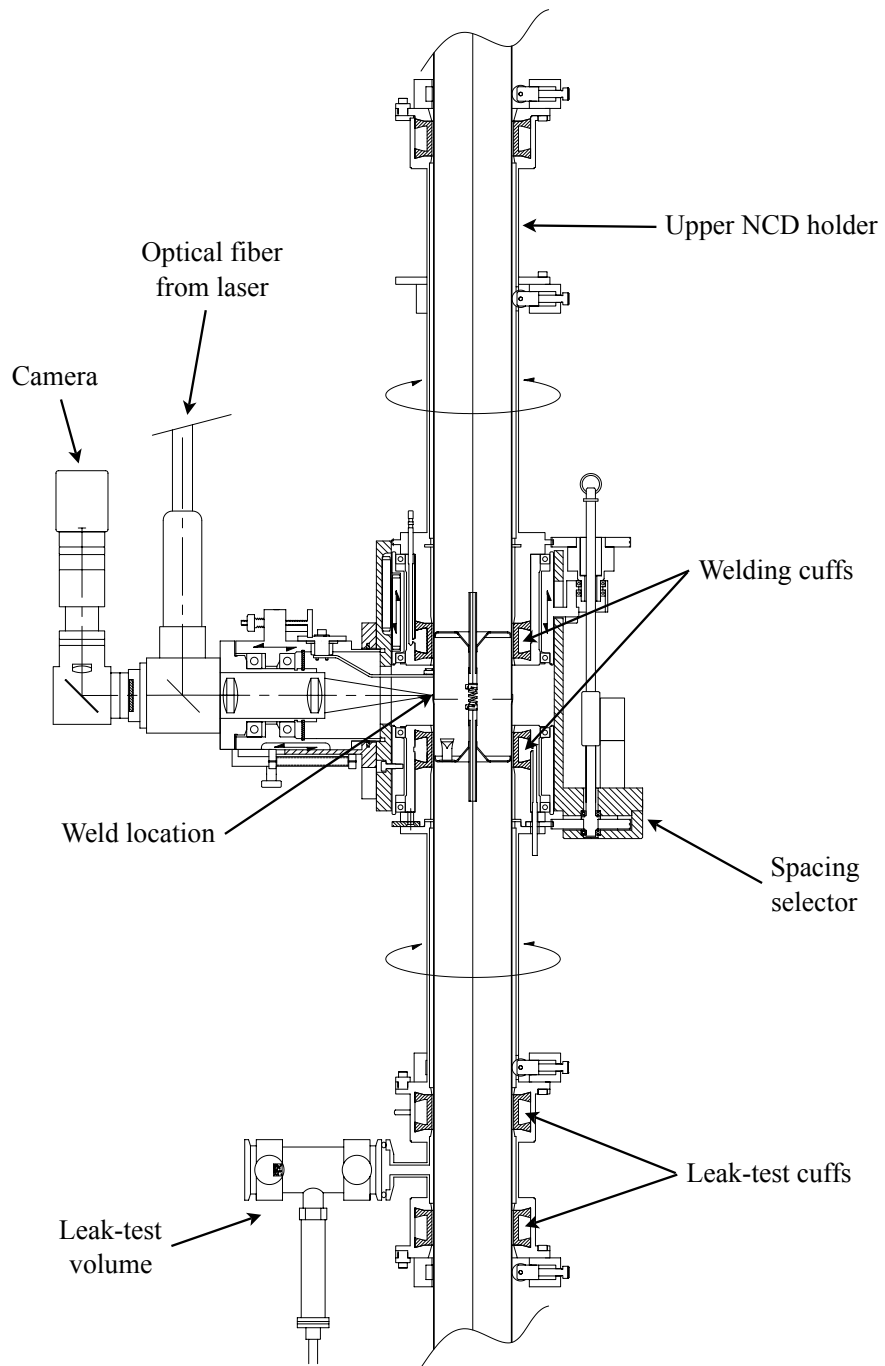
The fixture used for welding and leak testing the NCDs. Figure is from [53].
